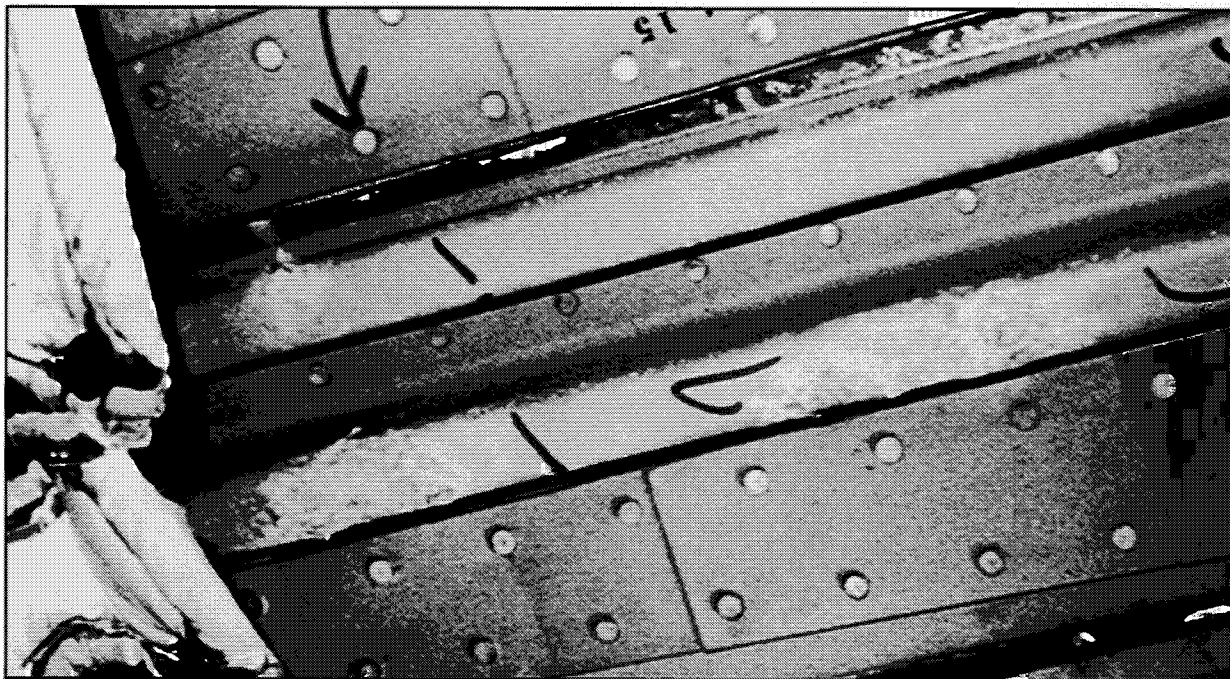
REMOVAL OF INSULATION BLANKETS EXPOSED CORROSION
